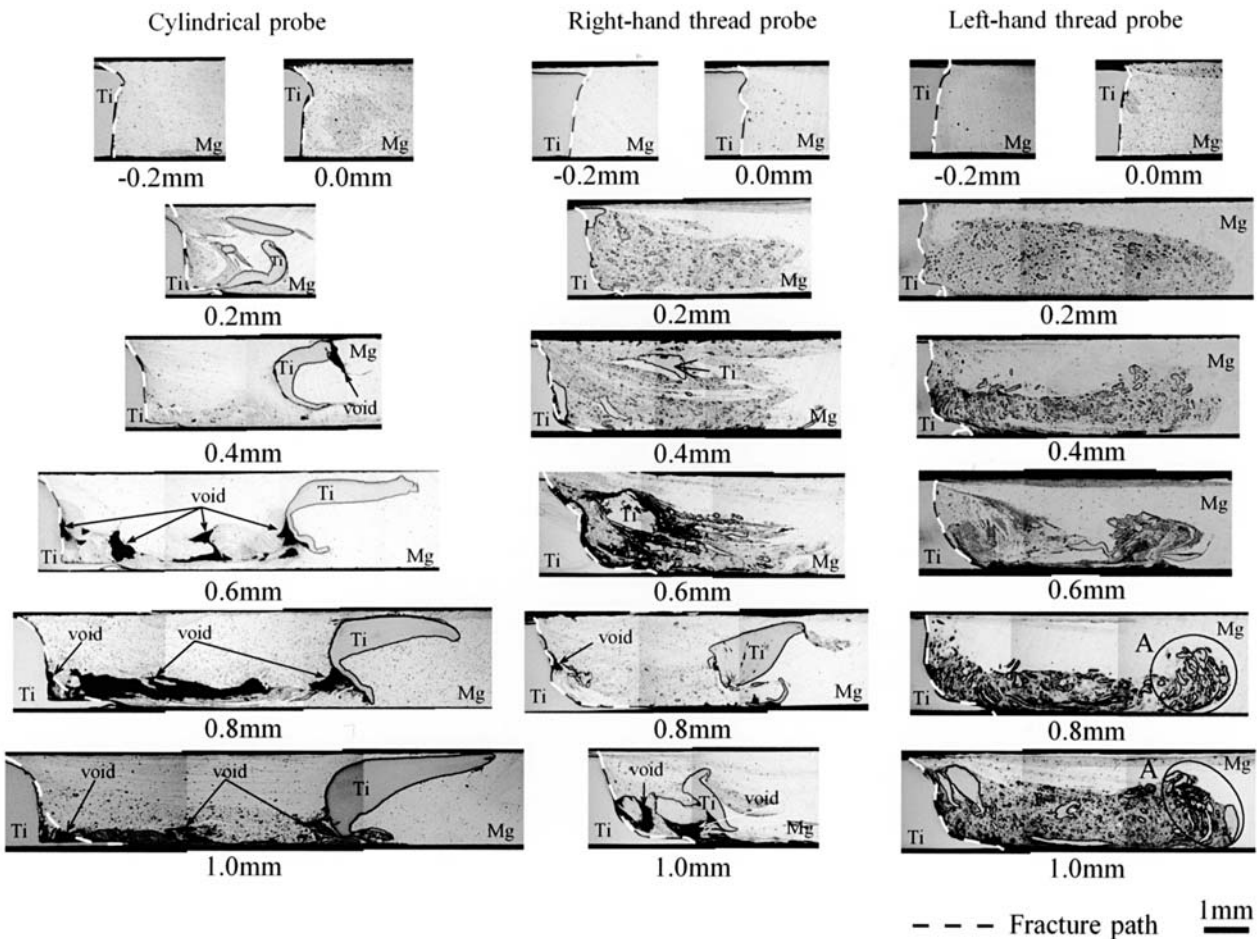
Cross-sectional structure of a welded joint using a cylindrical probe and a probe with thread under the various offset distances.
